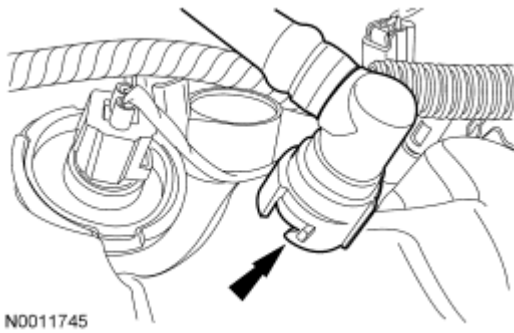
Locating Positive Crankcase Ventilation Tubes
